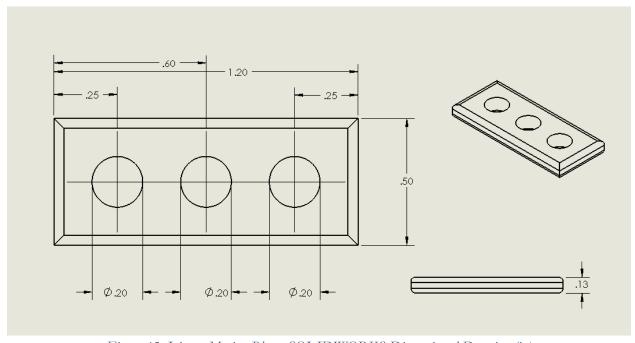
Linear Motion Plates SOLIDWORKS Dimensioned Drawing (in)
